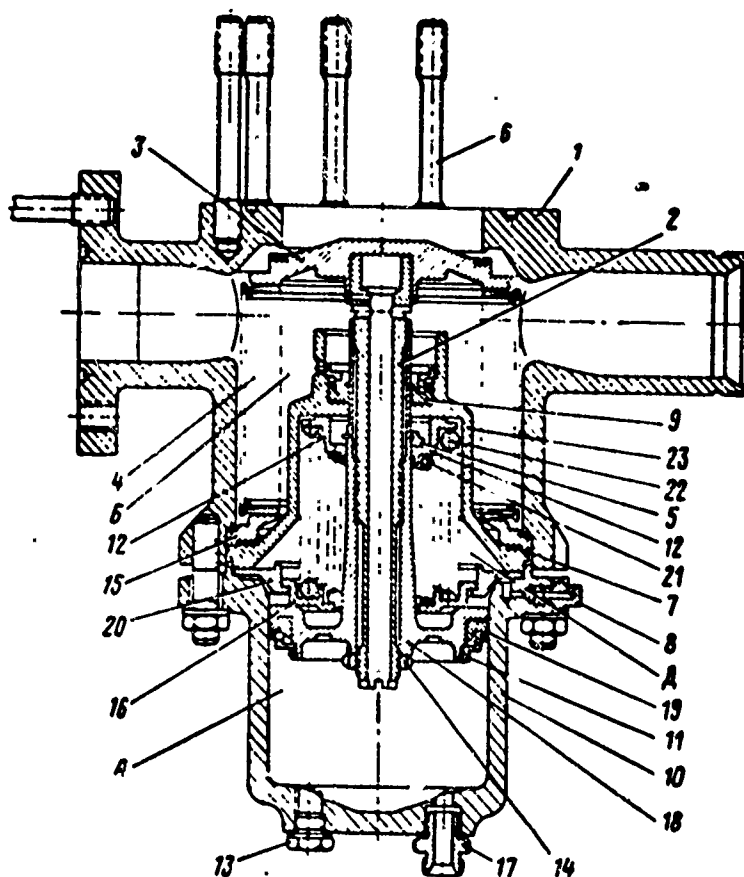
A normally open pneumatic valve: A, B - controlling cavities; A - vent cavity; 1 - housing; 2 - rod; 3 - valve disk; 4 - bellows; 5 - support; 6 - pin; 7 - gasket; 8 - vent connector tube; 9 - seal ring; 10 - cover; 11, 15 - rings; 12 - bushing; 13 - plug; 14 - nut; 16 - spring retainer; 17 - connector tube; 18 - piston; 19 - seal ring; 20 - support; 21, 22 - springs; 23 - guide.
